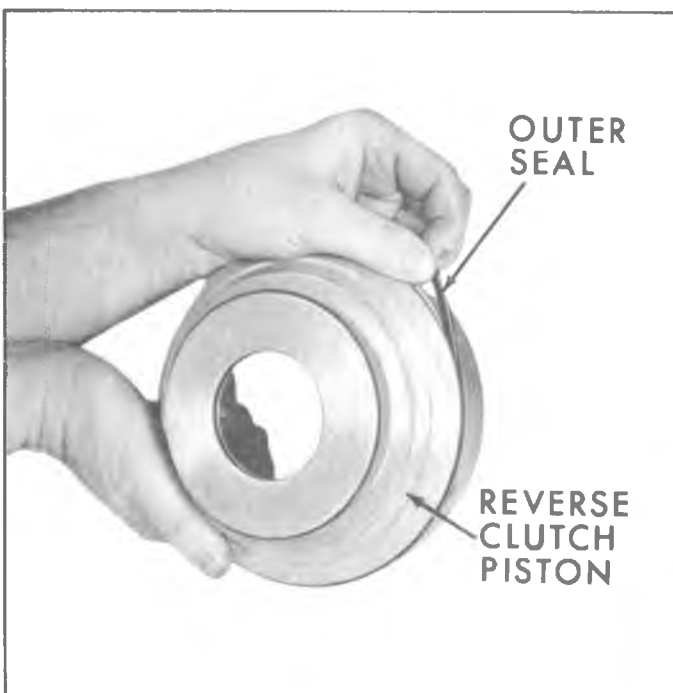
M—Removing Low and Reverse Clutch Piston Oil Seals
